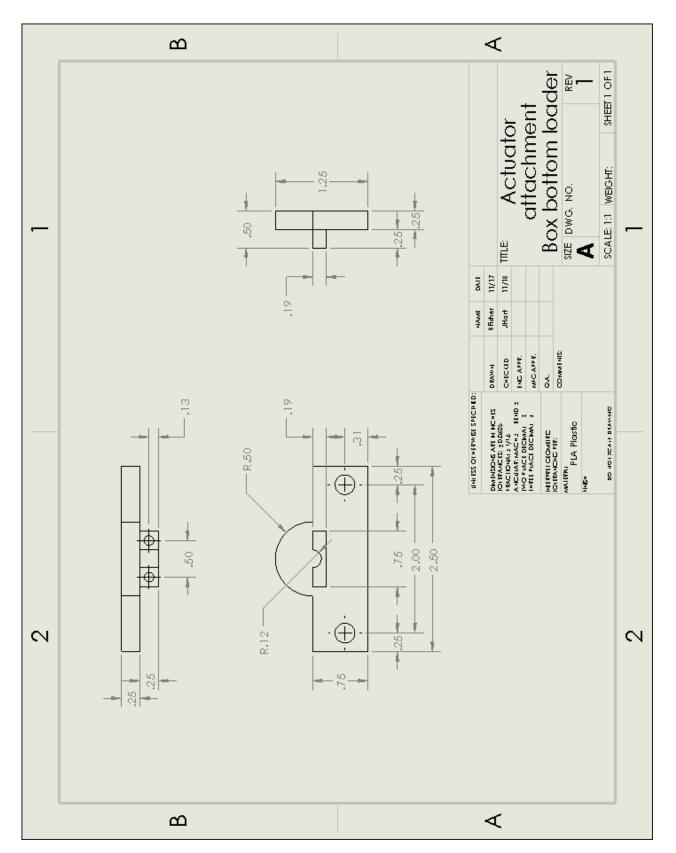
Box Bottom Dispenser Actuator Attachment Drawing (not to scale)
